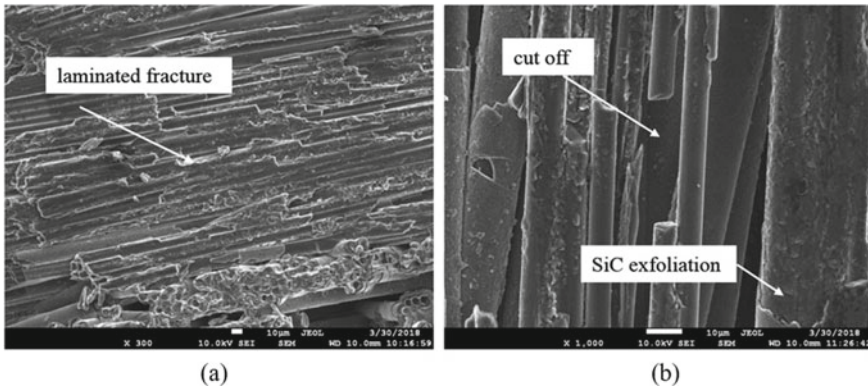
Example of machine-induced damage. a Extruding vault and fibre fracture. b Fibre pull-out [26]
